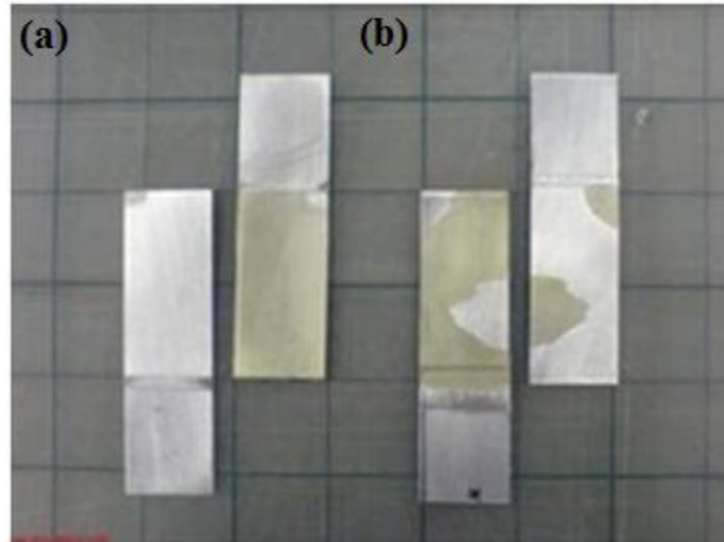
Single lap shear test specimen (a) no.001 (b) no.002. Specimen 002 shows more fracture jumping from one interface to the other compared with 001.
